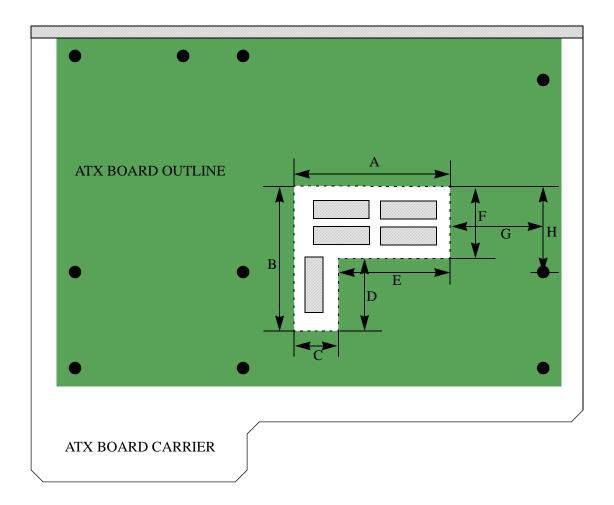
MVP ATX Chassis Carrier Frame Mictor Cutout.
